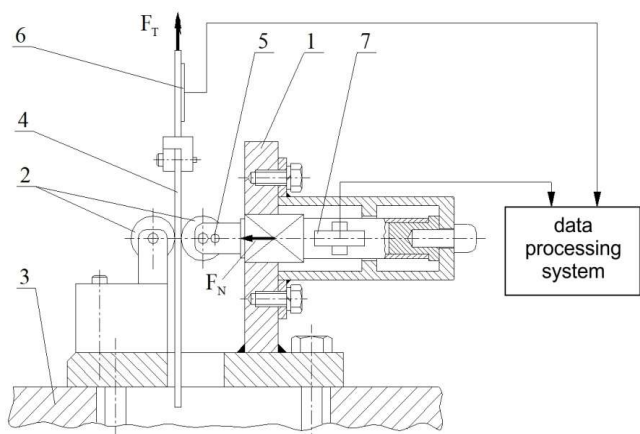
Schematic view of strip drawing test: 1 – frame, 2 – countersamples, 3 – base, 4 – specimen, 5 – fixing pin, 6,7 – load cell
